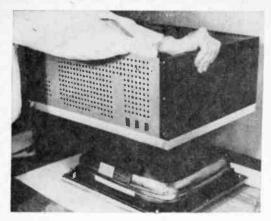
Picture tube is assembled to cabinet, sandwich style. Tube and cabinet are one after assembly.
